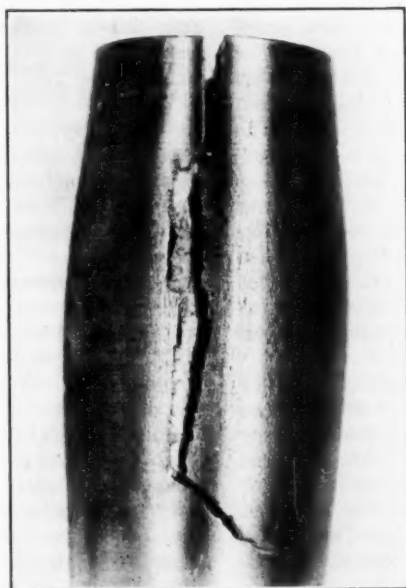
VIEW OF THE OUTSIDE OF THE CYLINDER OF FIG. 6 TAKEN BEFORE THE SECTION WAS MADE
